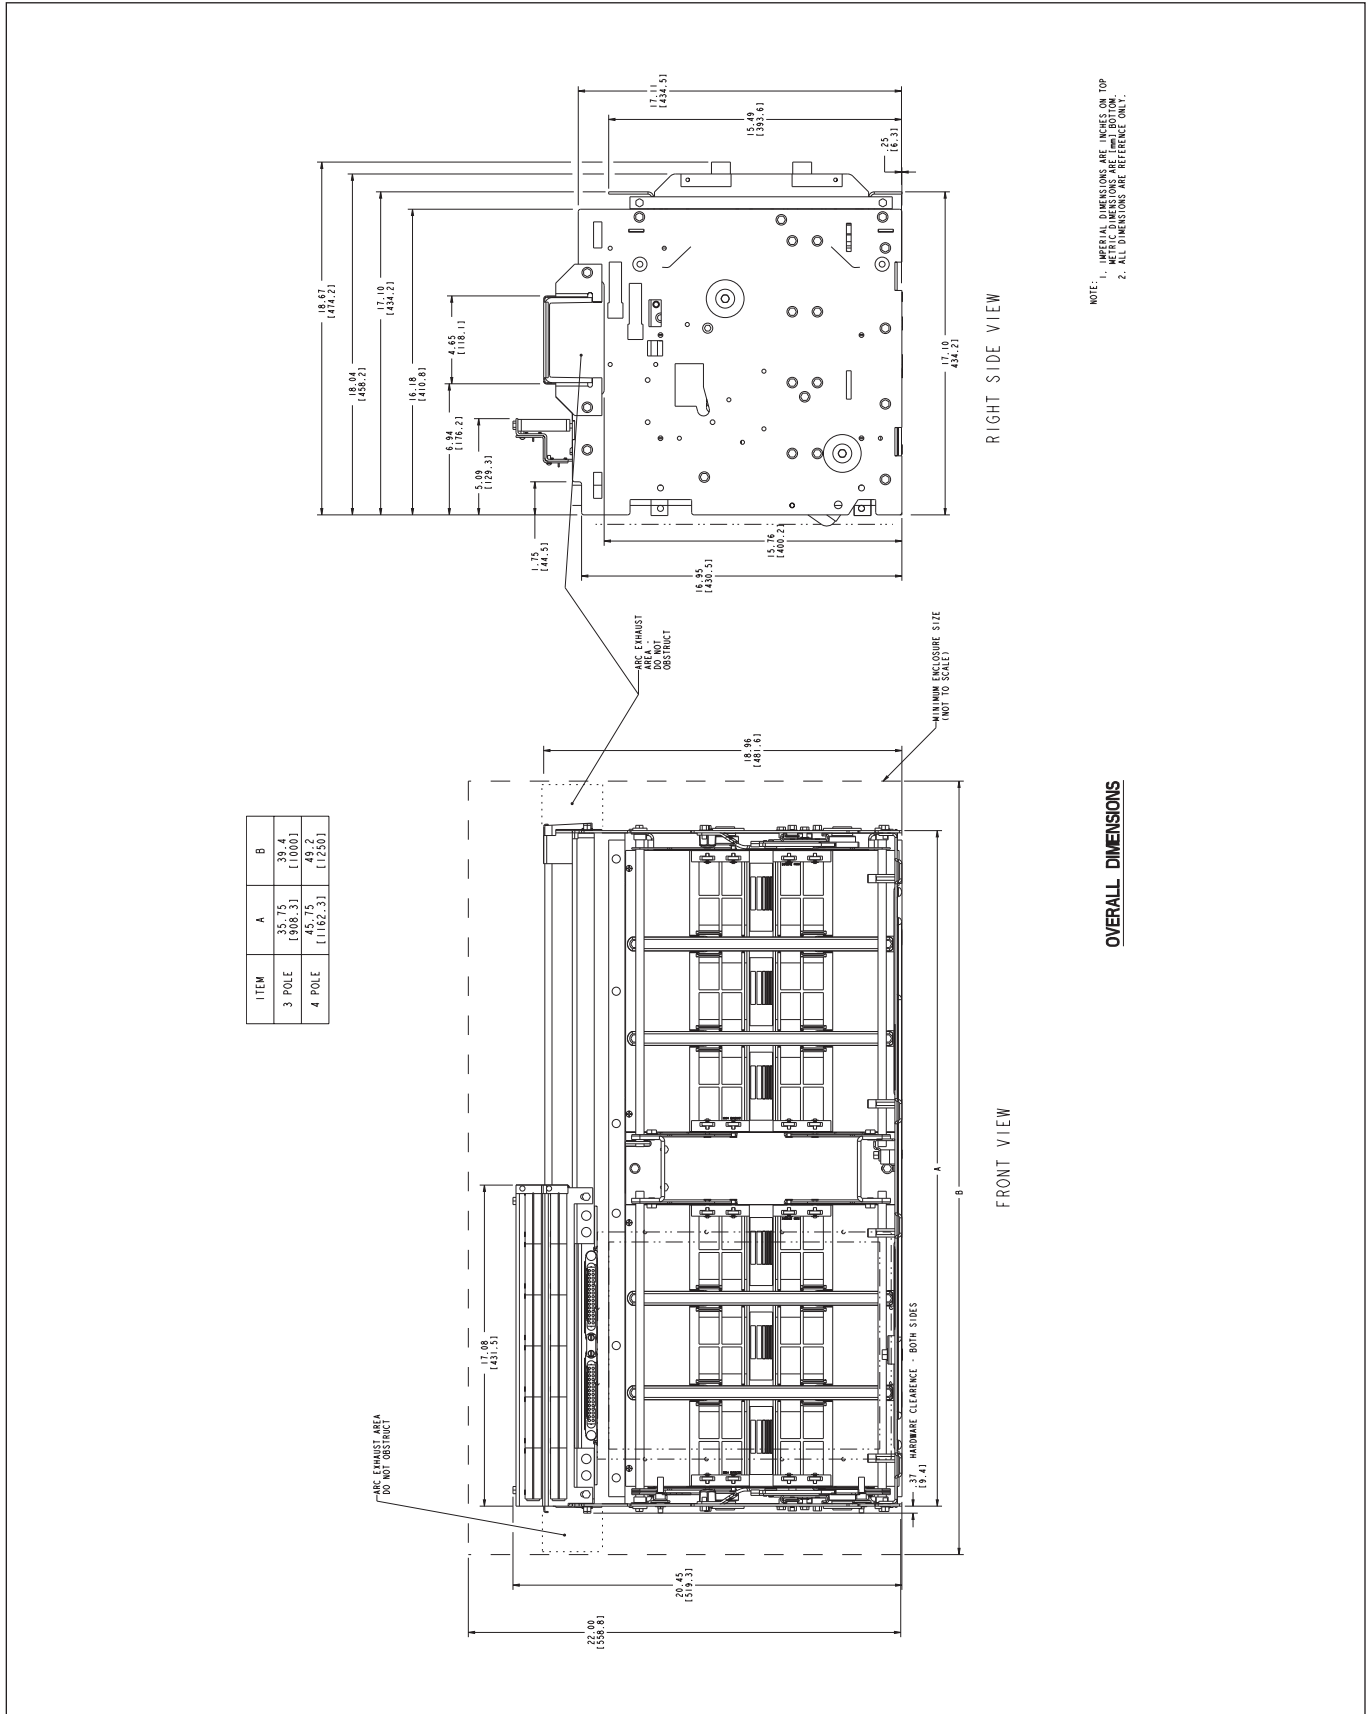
4000-6300A Double-wide frame standard Cassette (Accessory dimensions)
